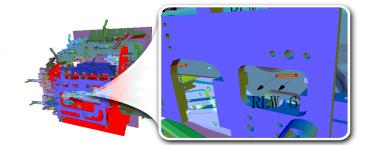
The geometric representation of the welding task specification displays a workpiece (red), the fixture and the welding stitches.
